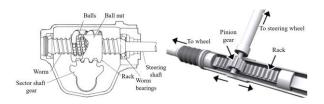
Rack and pinion gear and re-circulating ball steering gear.
